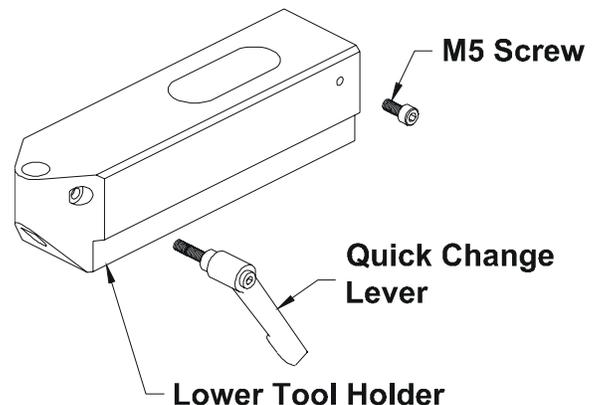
The Quick Change Lever makes it easy to change lower tools.
